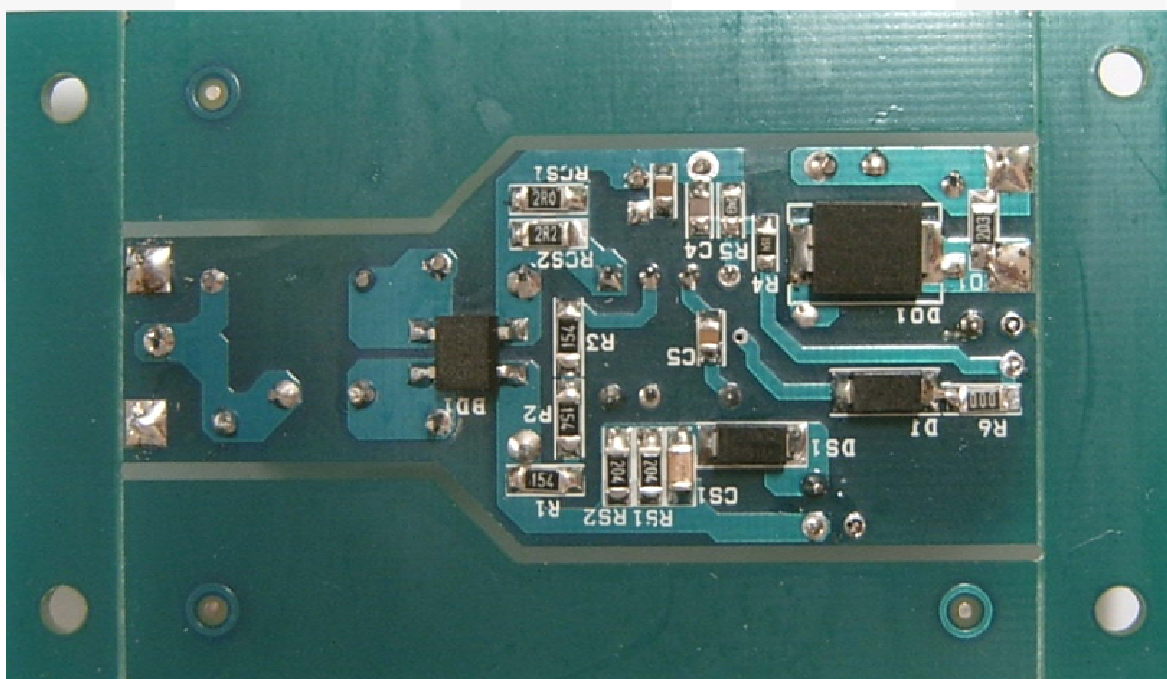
Bottom View (Dimensions: 59.9mm (L) x 25.5mm (W) x 15.0mm (H))
